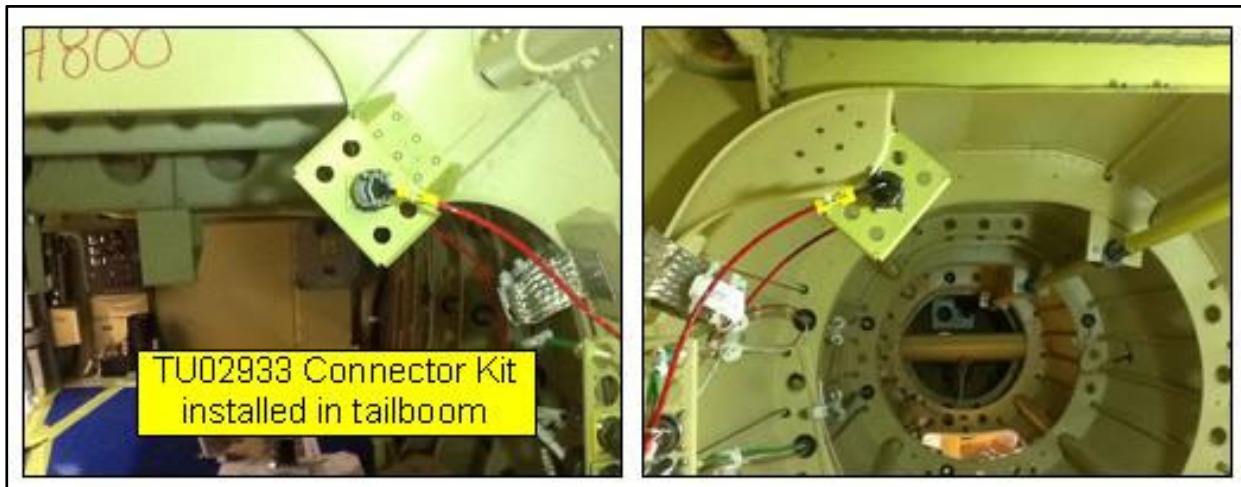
Tailboom disconnect, Connector Kit TU02933 installed per drawing 02933, alternate connectors listed in Wire Diagram.
